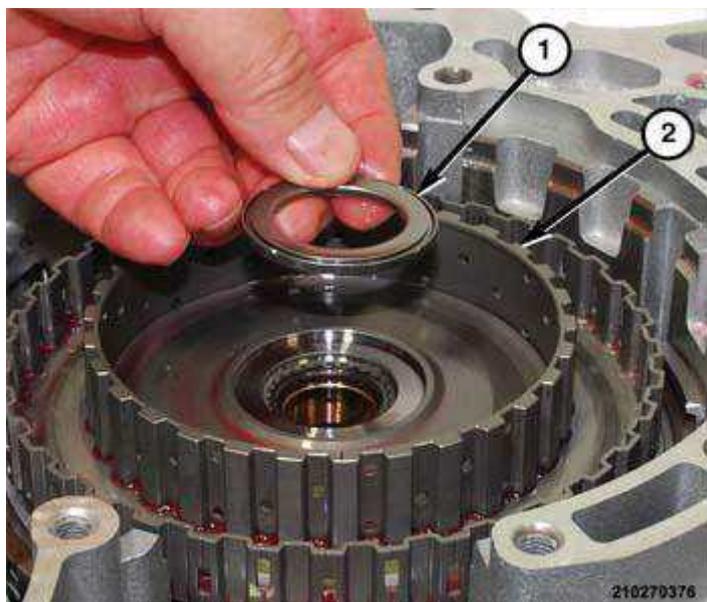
3/5/R Clutch & 2/6 Brake Hub, Thrust Bearing
